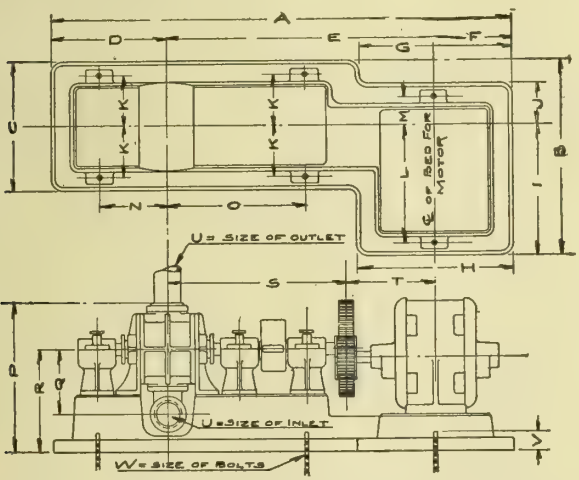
DIMENSIONS, GEAR-DRIVEN VACUUM PUMPS
